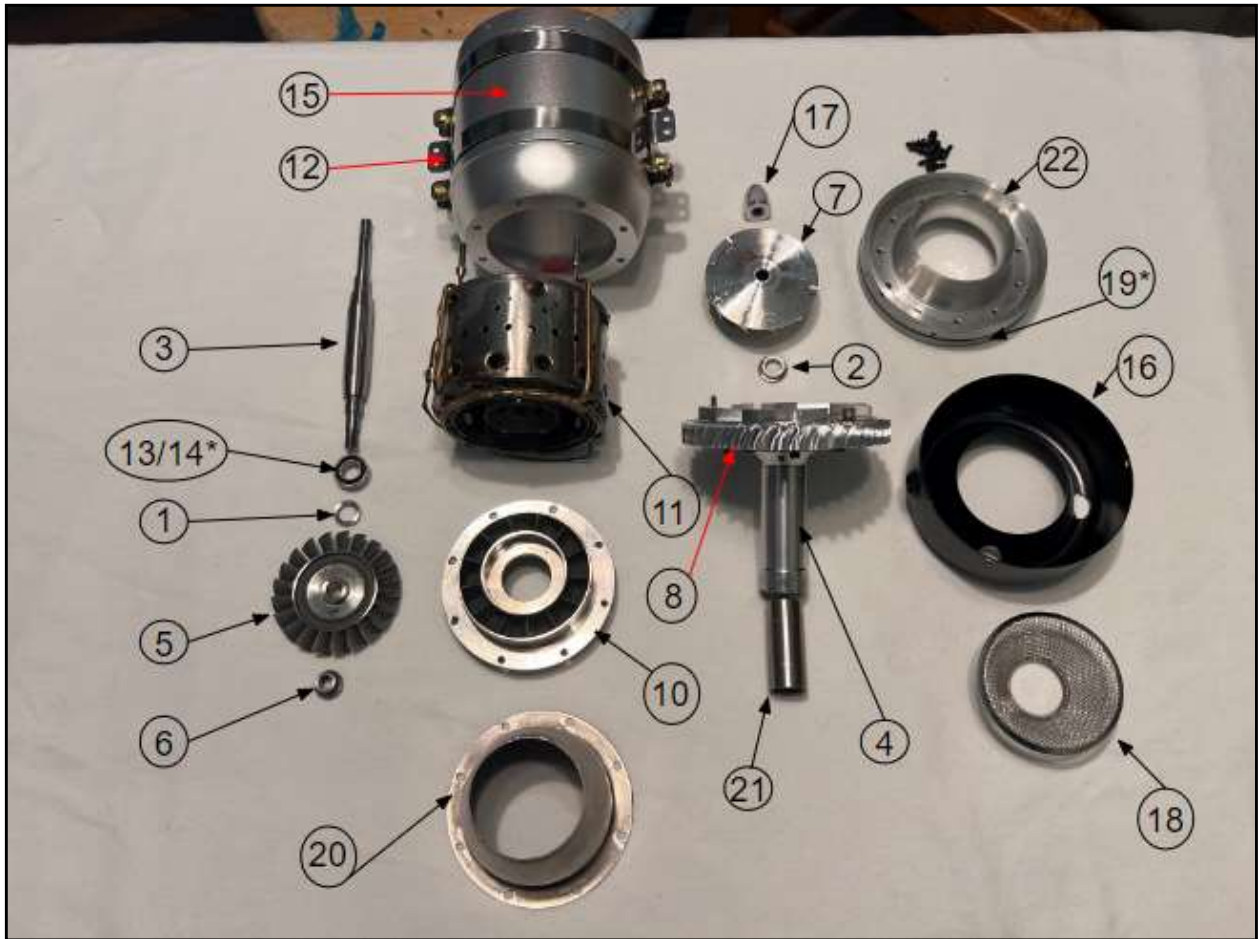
Exploded view of engine parts. (Red arrows are solely for visibility)
